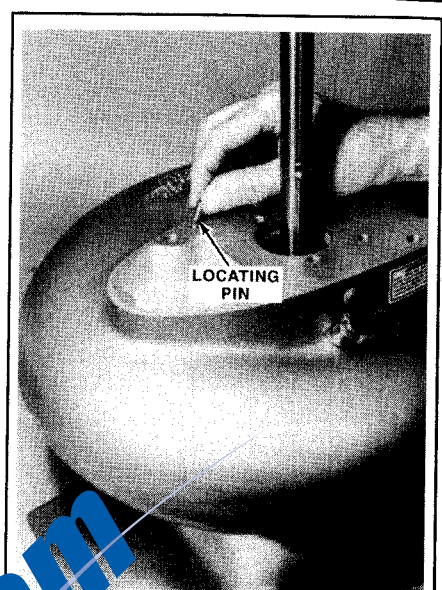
When you lower the jet drive, check for the dowel (locating) pins . . .
